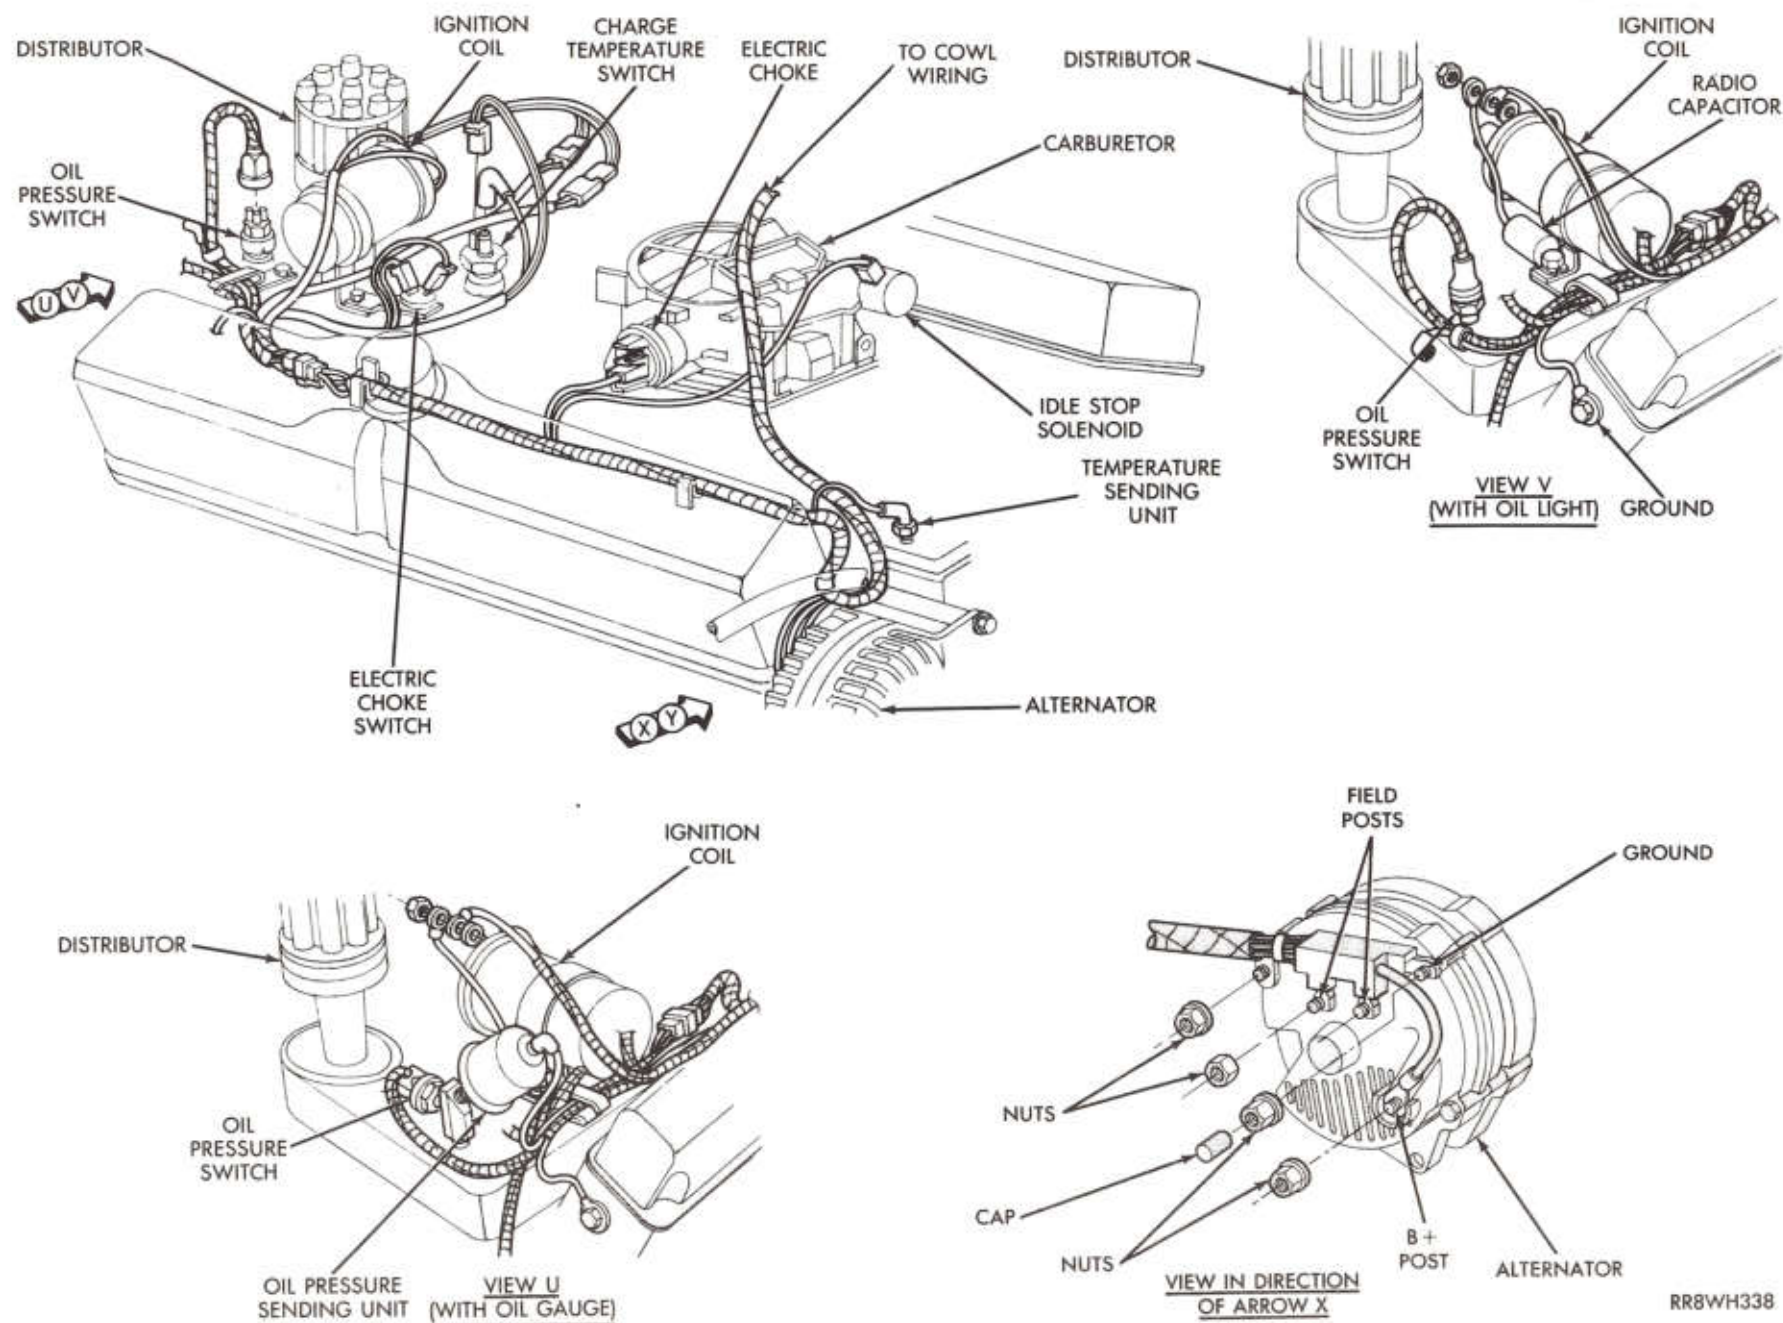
Engine Wiring and Component Identification 5.9L 4BBL 360 C.I.D.
